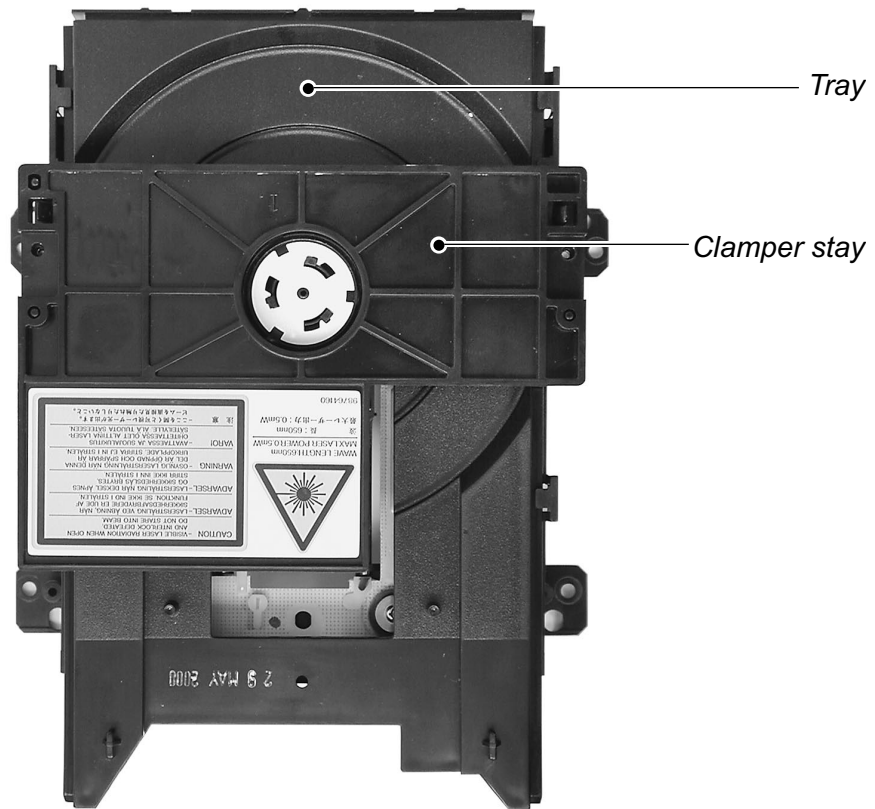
Mechanism chassis assembly (Top side)
